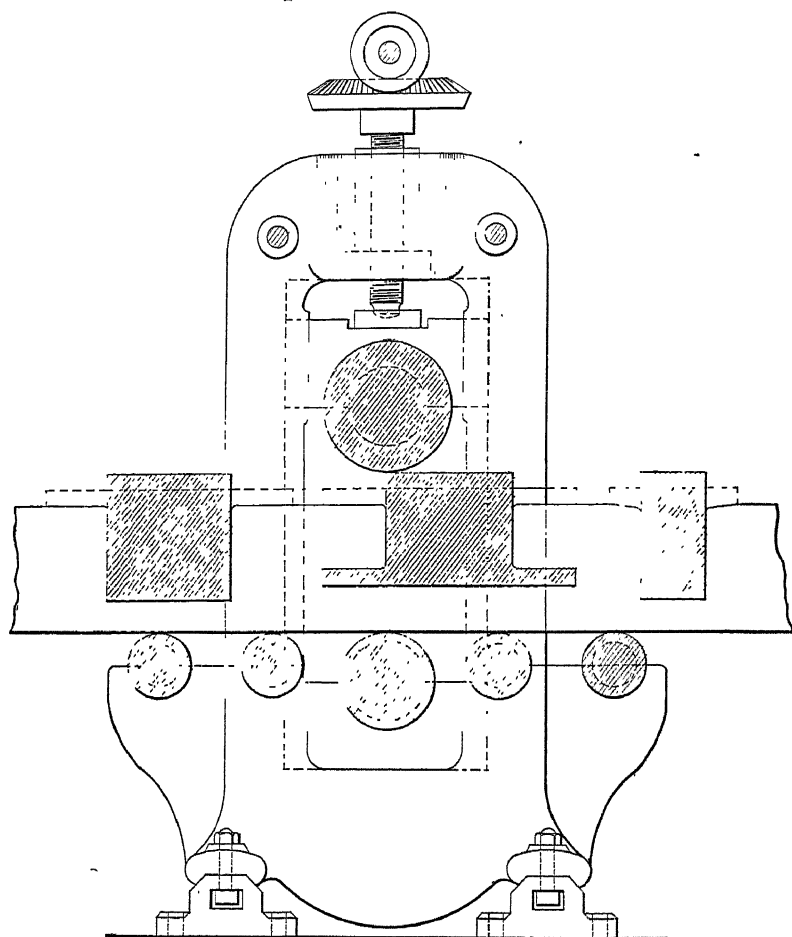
YORK TRANSVERSE MILL FOR ROLLING FLANGES ON INGOTS.
